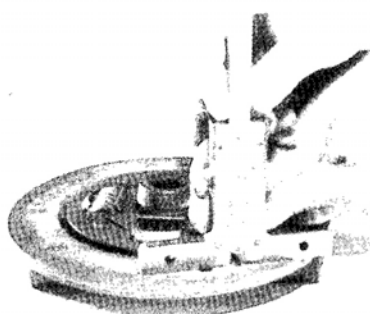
View showing procedure for measuring clutch disc wear. Refer to text.
